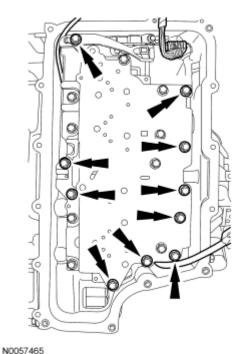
Locating Main Control Valve Body Bolts Courtesy of FORD MOTOR CO.
